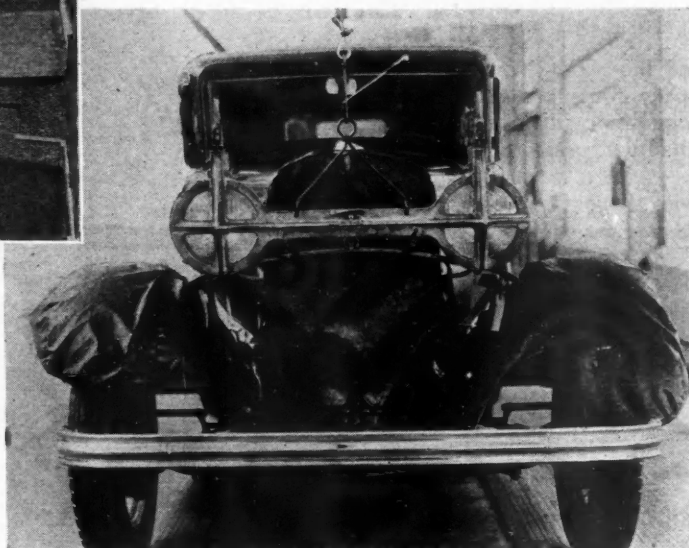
Headlamps quickly and accurately adjusted by means of this simple fixture. Quick acting clamps align the lamps on center while the principal axis is located by a spirit level on the fixture
